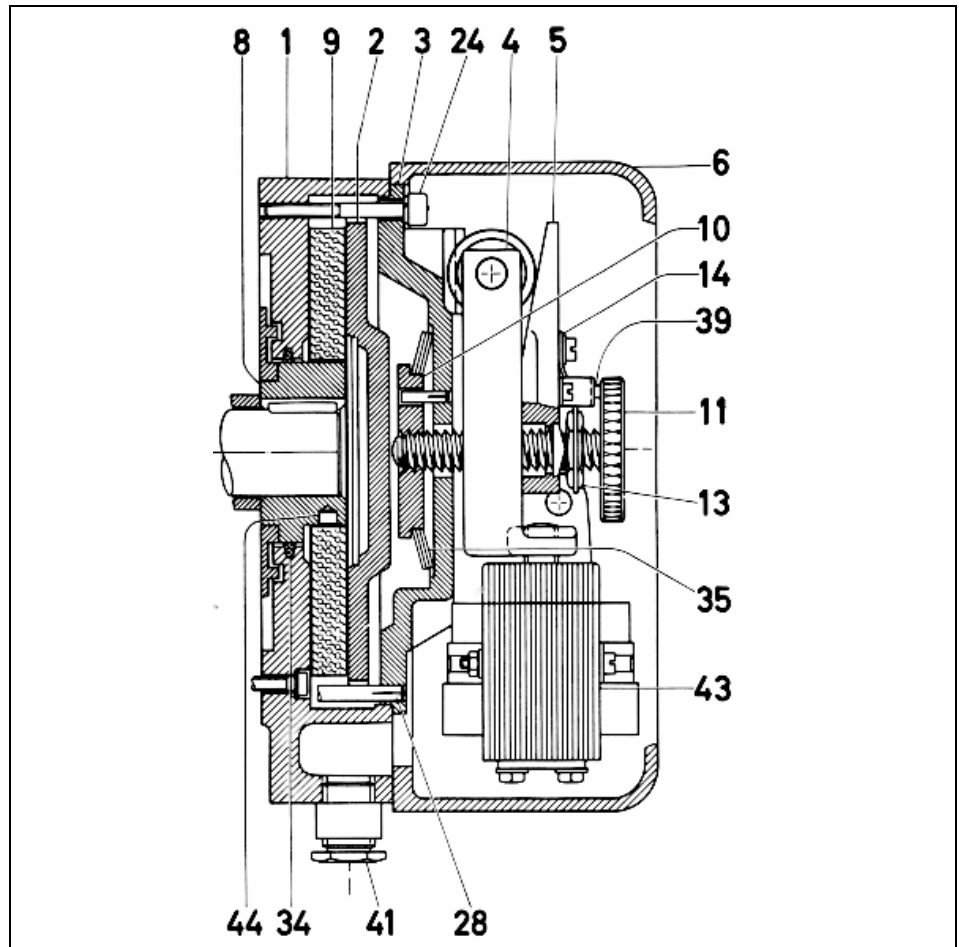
Single-disc spring-loaded brake with A.C. solenoid release
